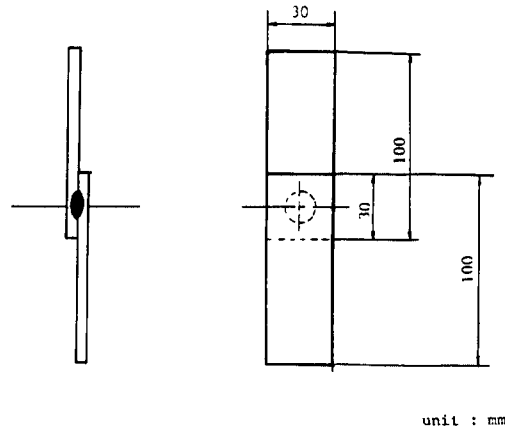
Tensile shear test specimen and cross sectional specimen. unit : mm
